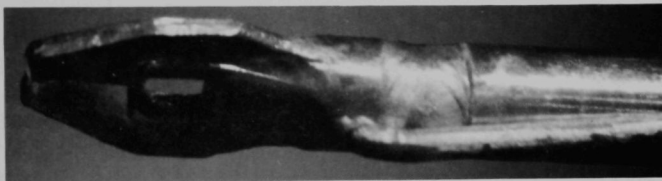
Spade-to-Tube Weld on Defective Element E47, Showing Lack of Fill Weld. ANL Neg. No. ID-103-L5098.
